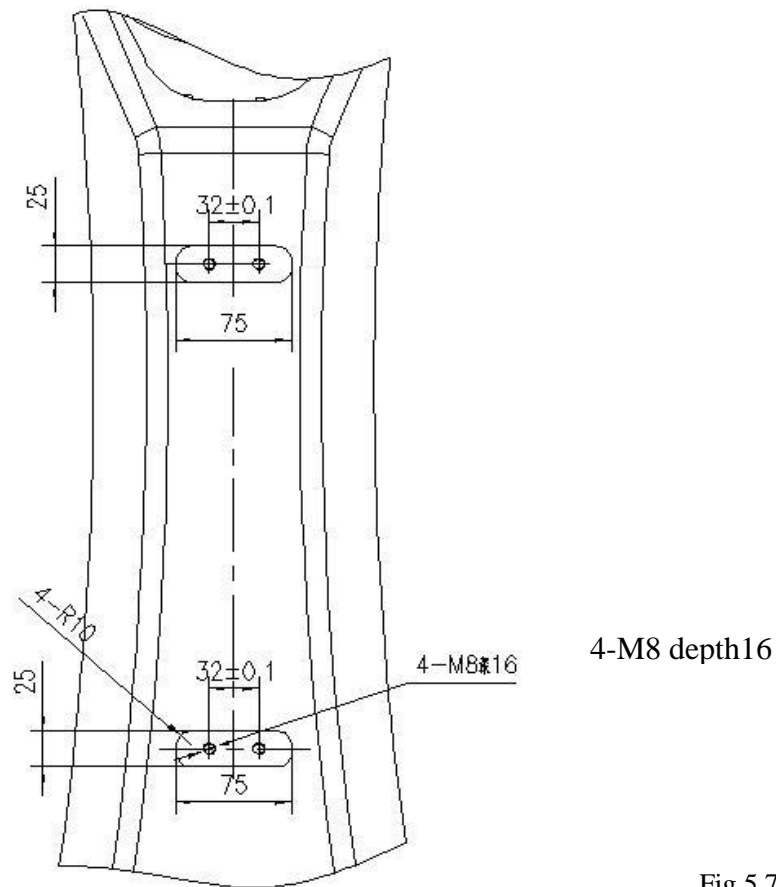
the base part of J2 shaft assembly base on external dimension drawing
